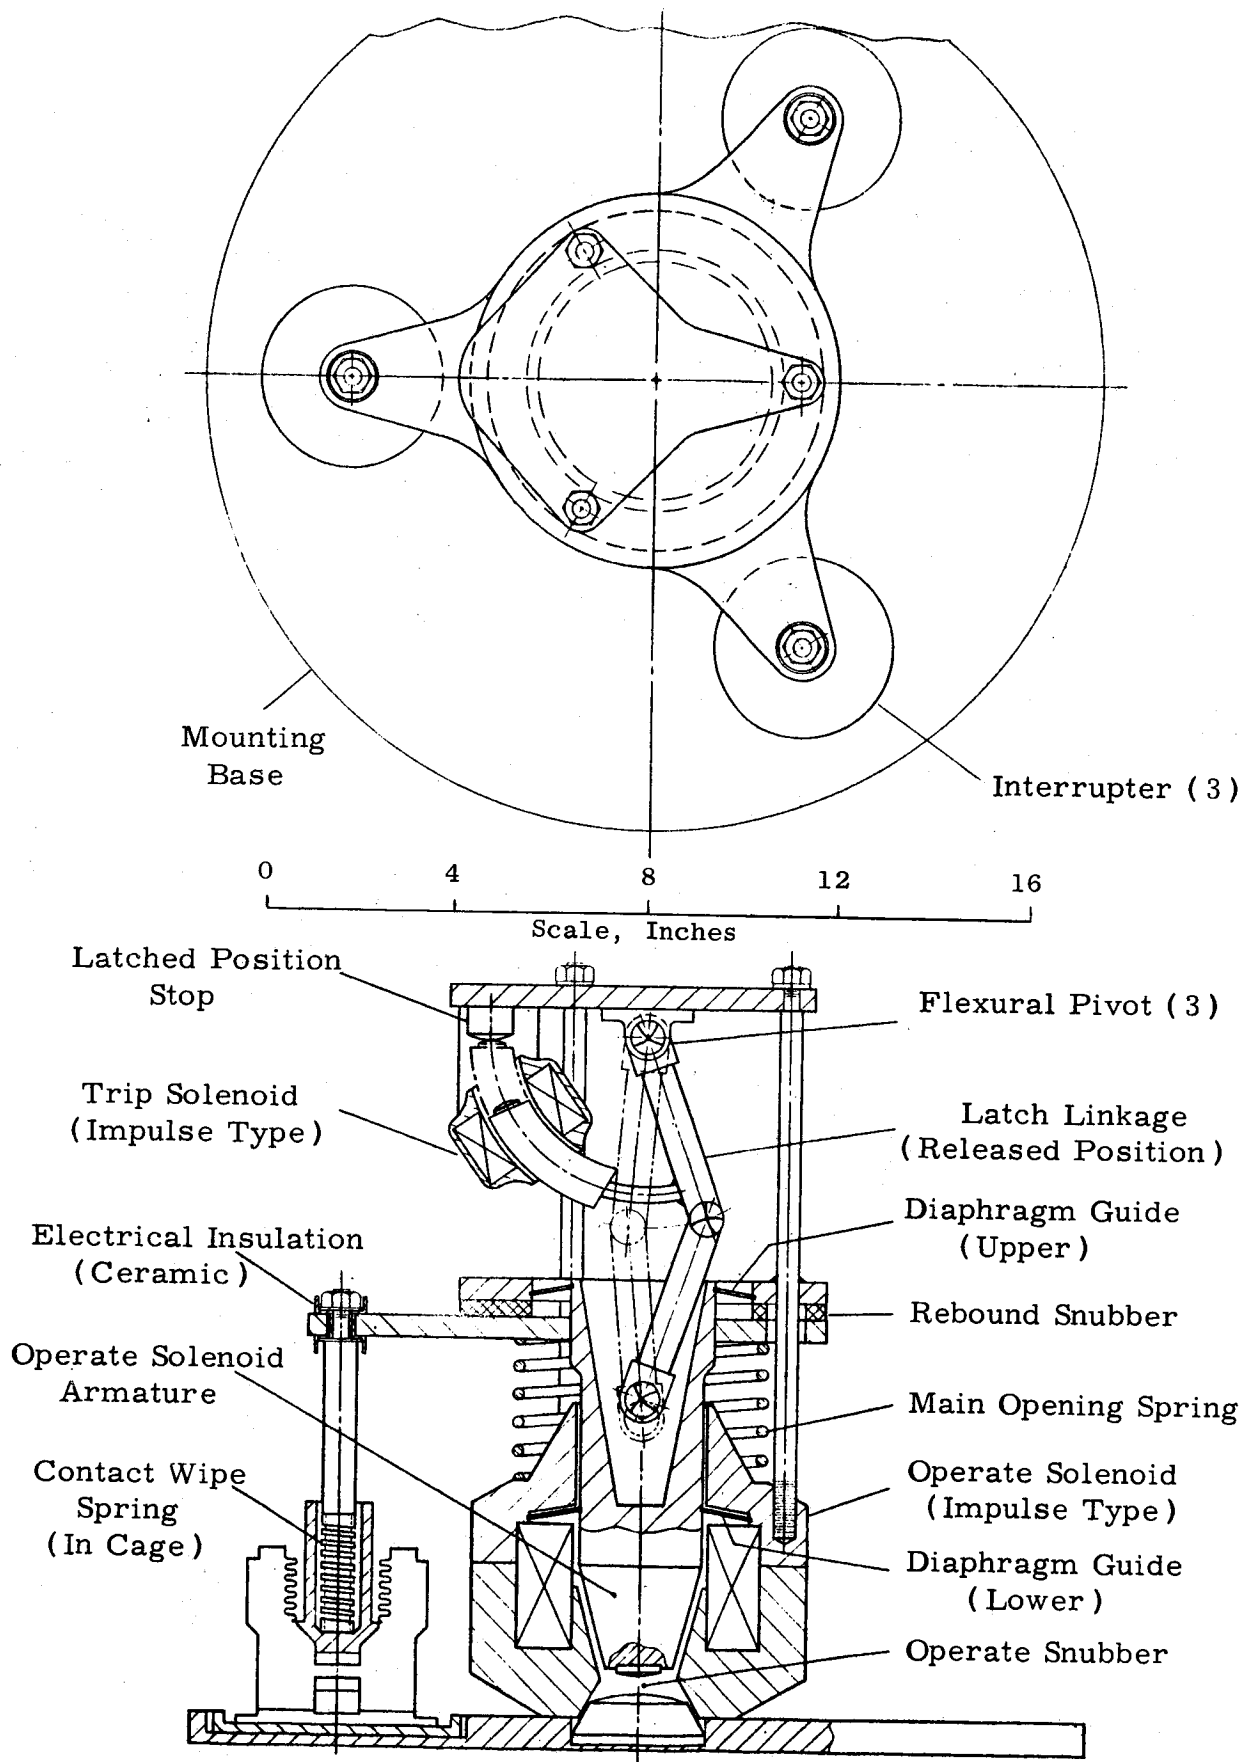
Open Flexural Actuator Mechanism - AC Circuit Breaker.
